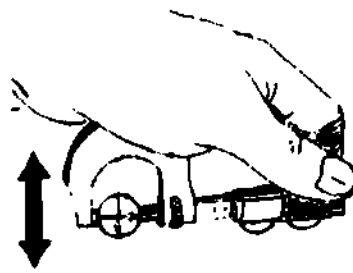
Measuring crankshaft main journals and crankpins for out-of-round with a micrometer.
